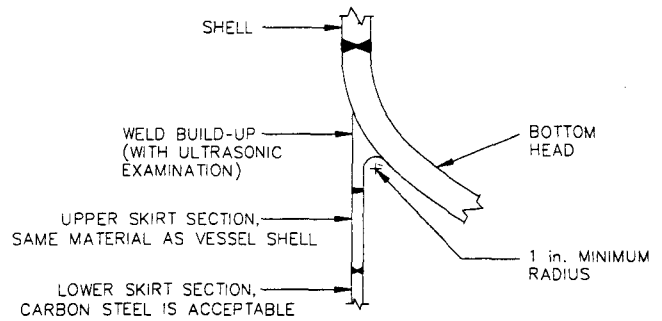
Weld Buildup at Skirt-to-Shell Attachment
